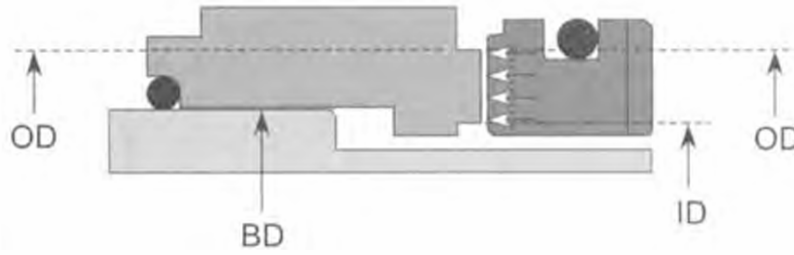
Geometric dimensions of an OD pressurized the mechanical seal by Karrasik [3].
